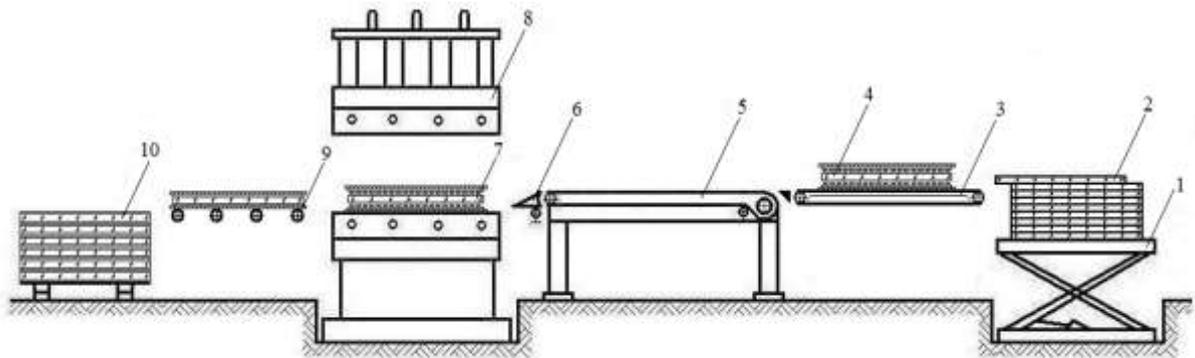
Line equipped with single daylight press powered with conveyor type tablet, for plating the chipboards with aluminum foil: 1-vertical moving platform; 2-chipboard; 3-belt conveyor; 4-composite package; 5-conveyor type tablet; 6-transfer plate; 7-composite package; 8- single daylight press; 9- roller conveyor; 10- stacking pallet.
